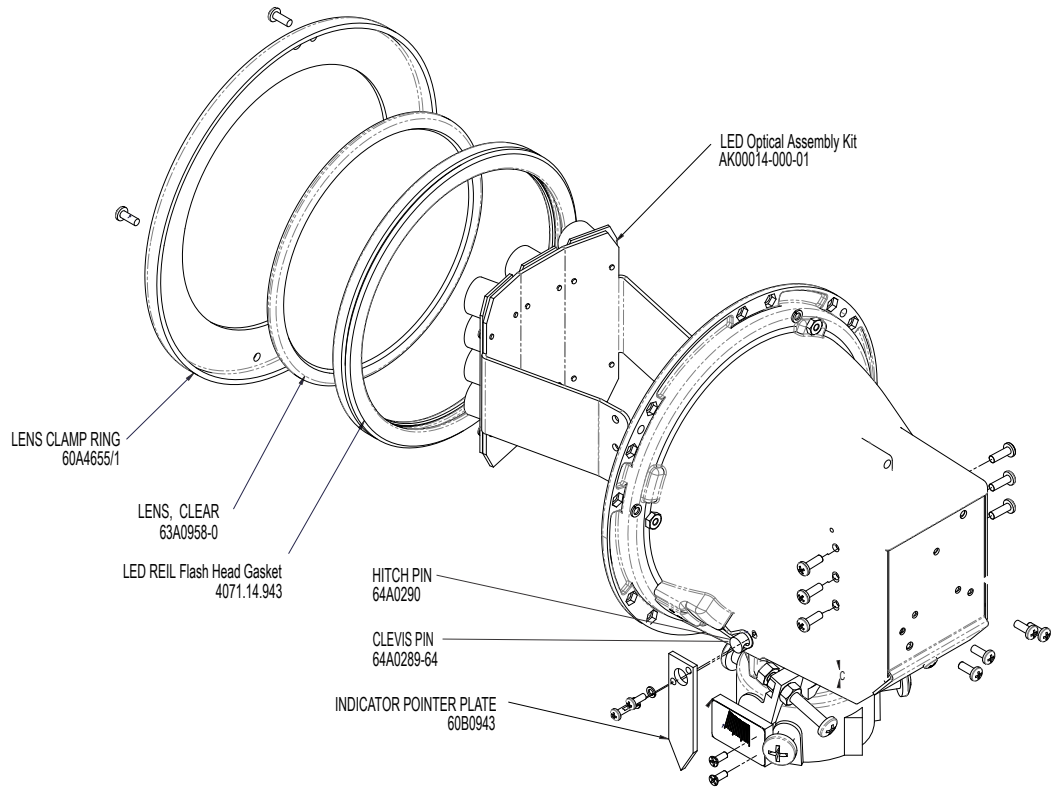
LED REIL Flash Head Assembly KIT AK00014-000-01
